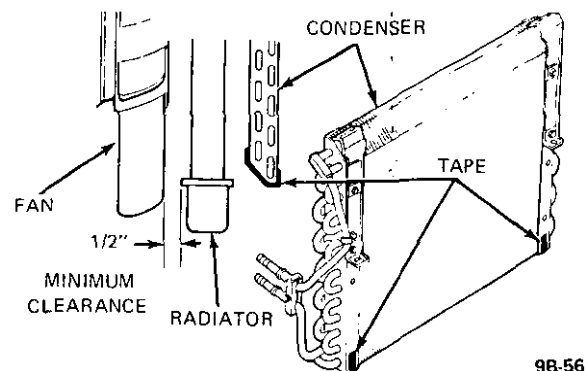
B-76 Clearance Between Lower Radiator Tank and Fan Blades - Opel 1900 Manta
